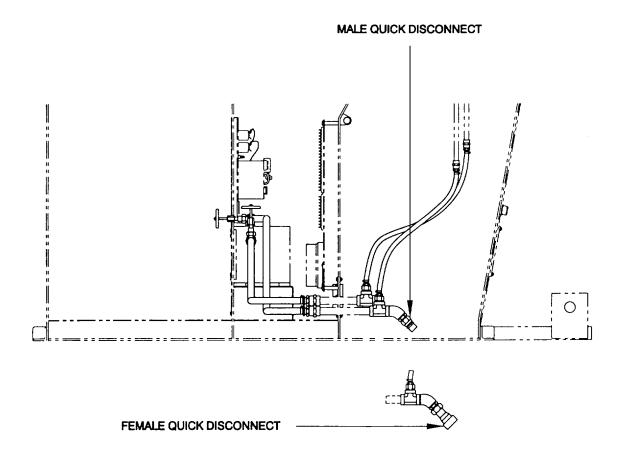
Propulsion Module/Powered Section Assembly (Operator's Cab - View B). (Sheet 3 of 11)
